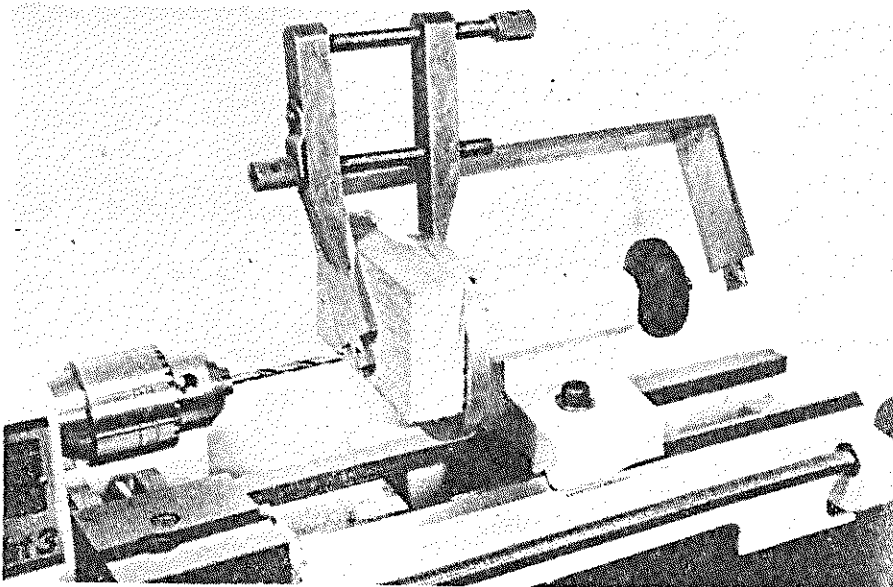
Drilling the pin holes with the hand drill. Note use of sawing board and tool-maker's clamps
